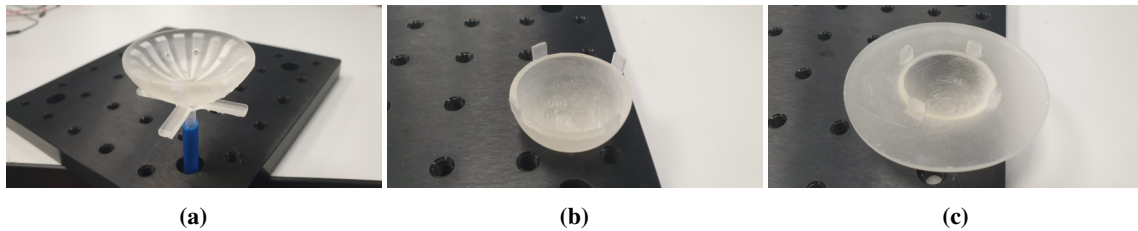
3D Printed Three-axis Femto-Air Bearing
